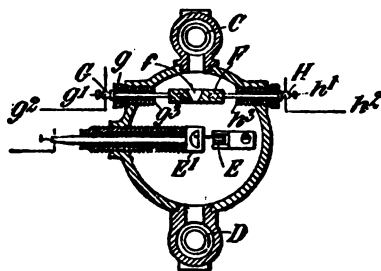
Pennington's Internal Combustion Engine for Heavy Oils (Transverse Section).
